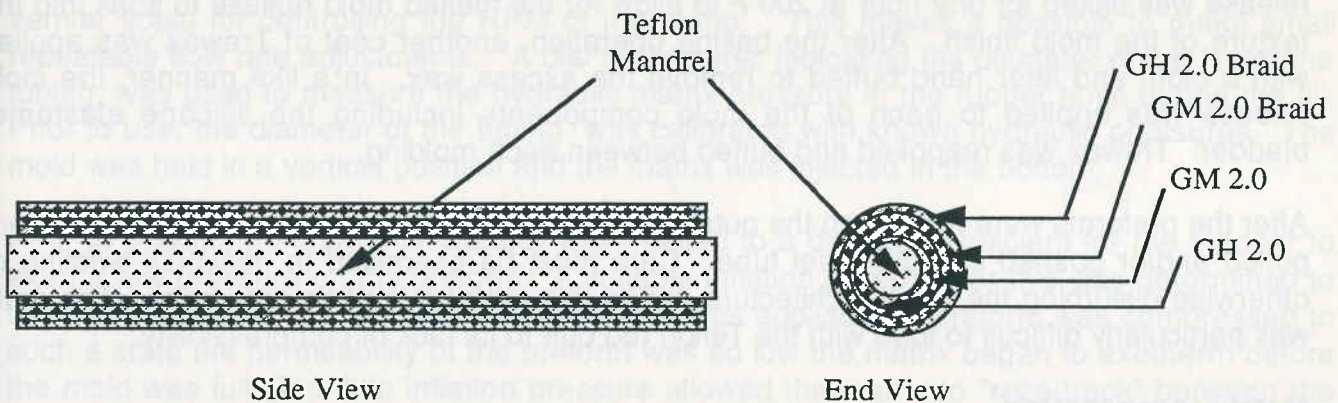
, Illustration of Preform for Group 1 Tubes with Mold 2 Mandrel
